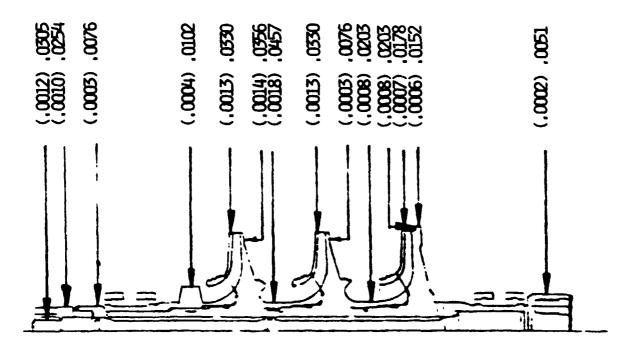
Mark 48-F Turbopump Rotor Balance Assembly
